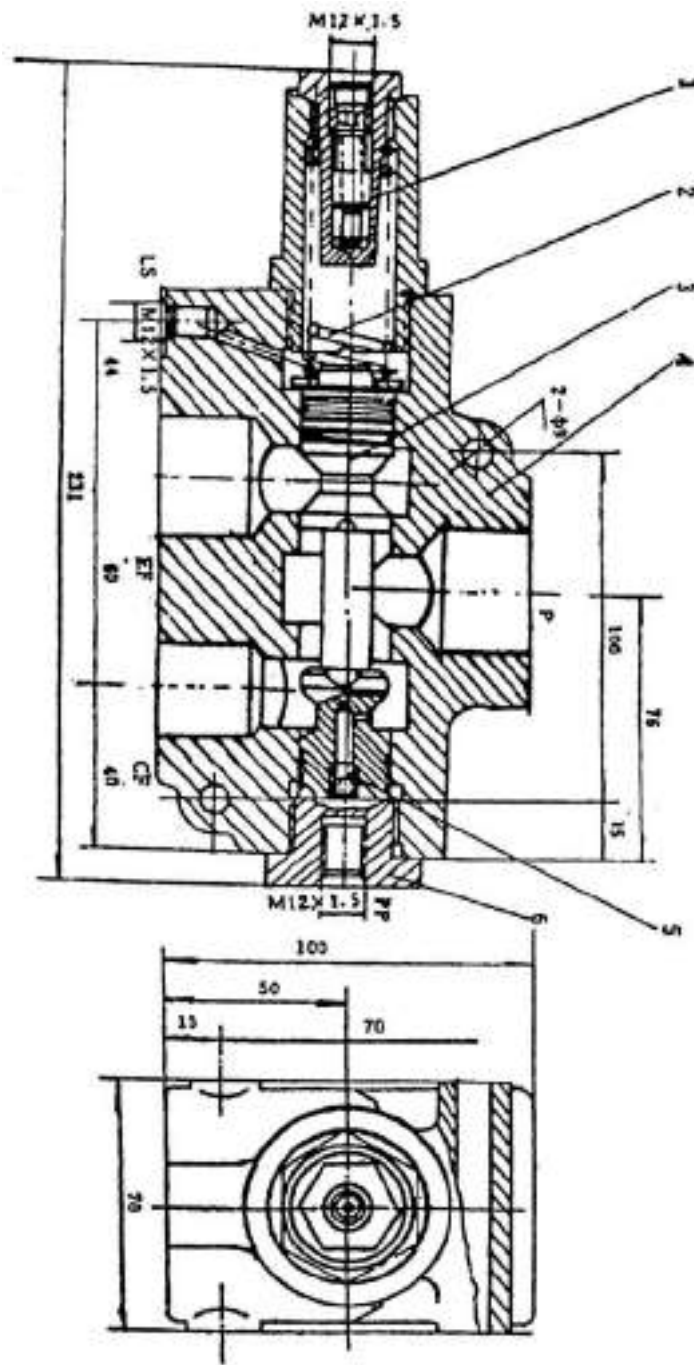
Model YXL-F250L-N7 Priority Valve
